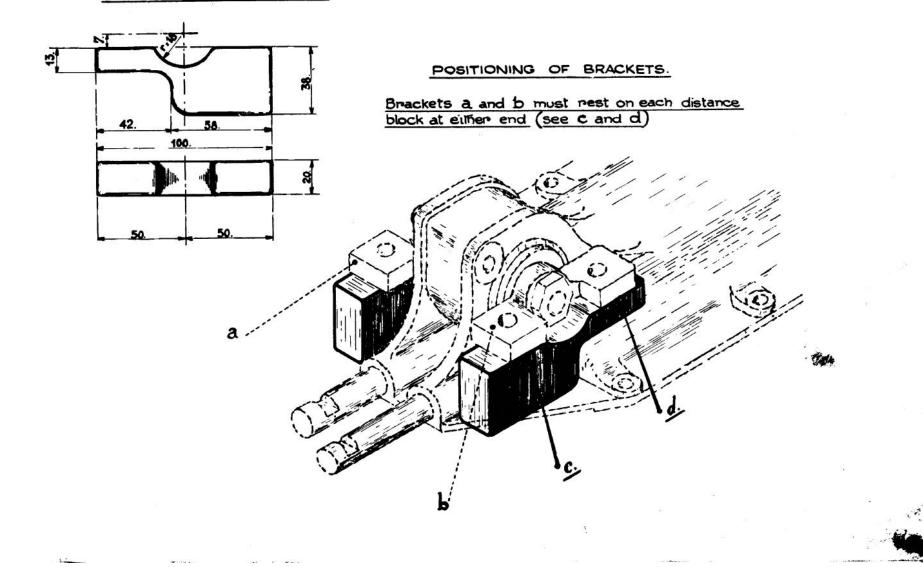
DETAIL OF SELECTOR SHAFTS LOCKING DEVICE.
